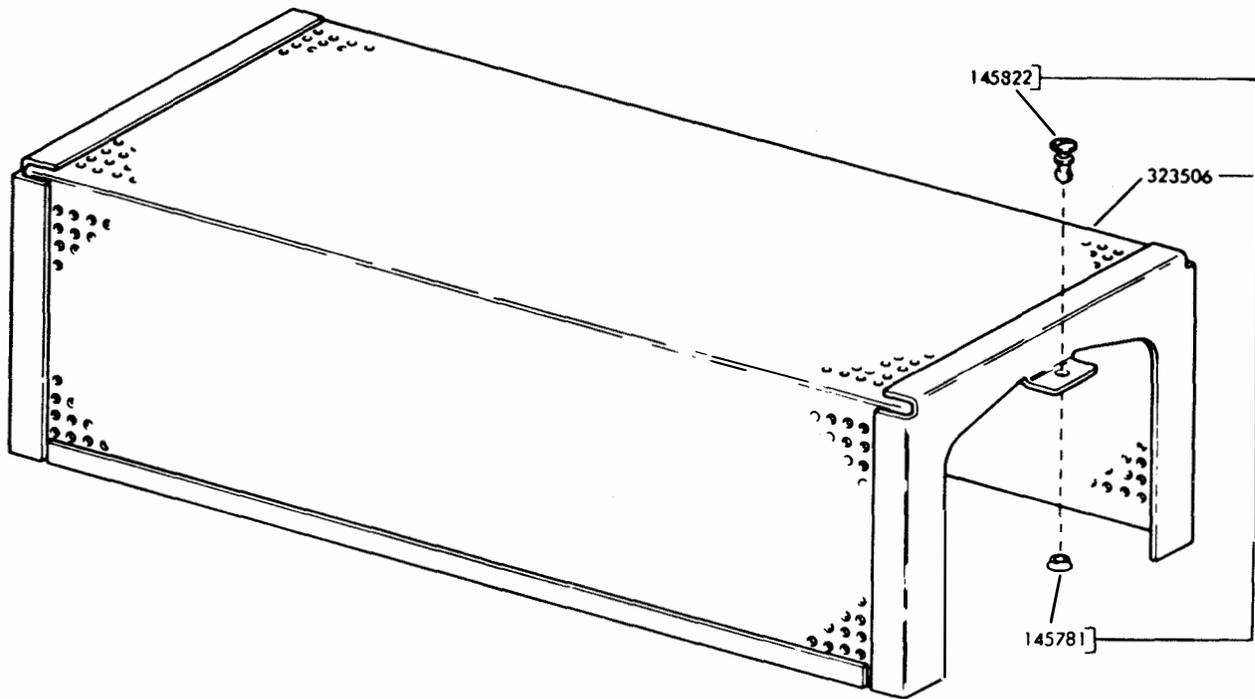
Electrical Service Assembly Covers (Sheet 2 of 2)
